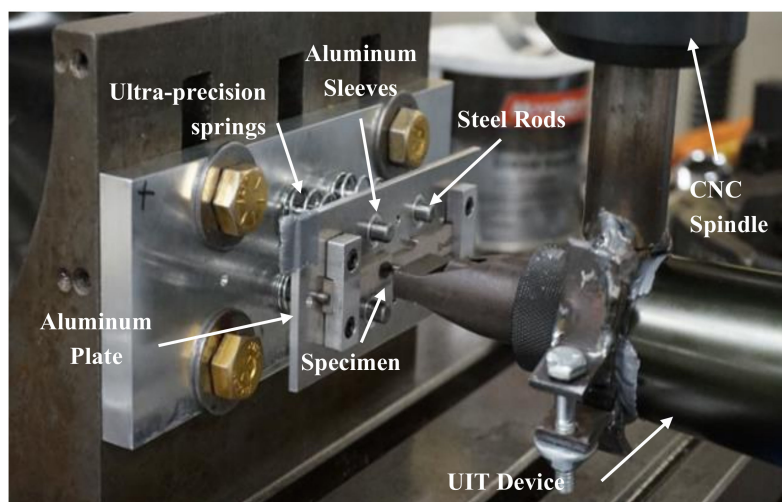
Spring assembly fixture with a clamp mounted to the CNC machine.
